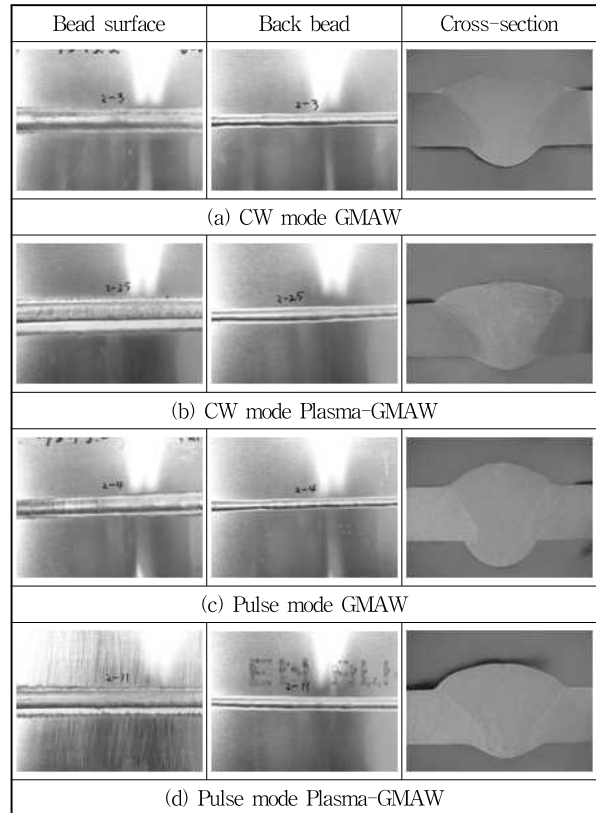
Weld bead shapes for Al 6061 alloy
